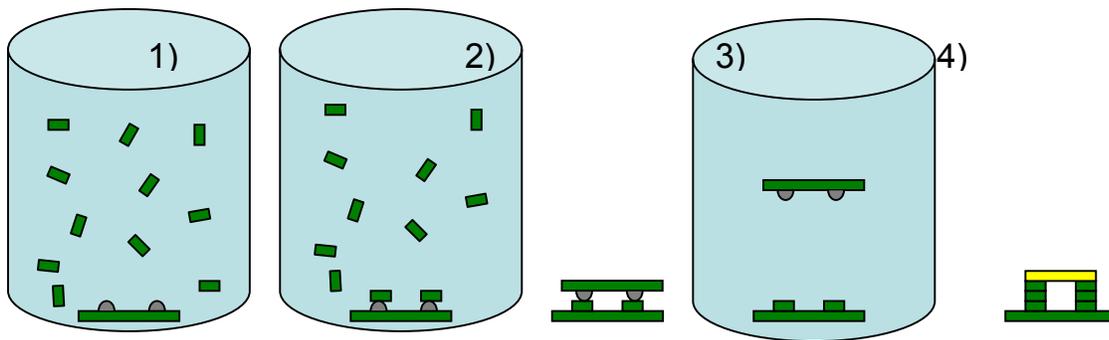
Assembly Process. 1) Solder is applied to self-assembly substrate and parts are put into beaker. 2) Manual stirring and agitation is then applied to assemble the parts onto the substrate. 3) Substrate is taken out of water and glued to final substrate. 4) Once glue is dry, assembled component is placed into beaker which allows the subassembly substrate to release the final substrate. 5) This process is repeated until the desired amount of layers is achieved.
